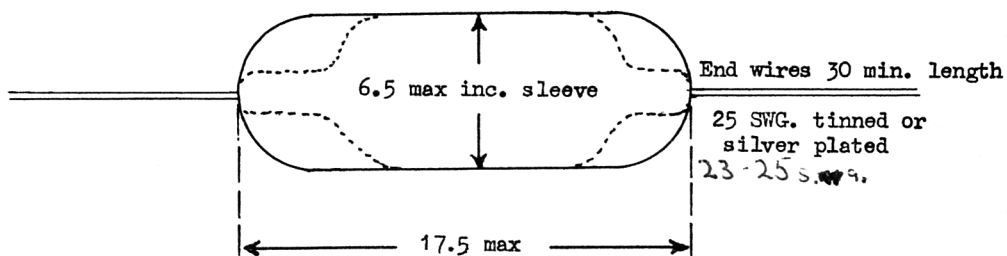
DIMENSIONAL OUTLINE DRAWING
